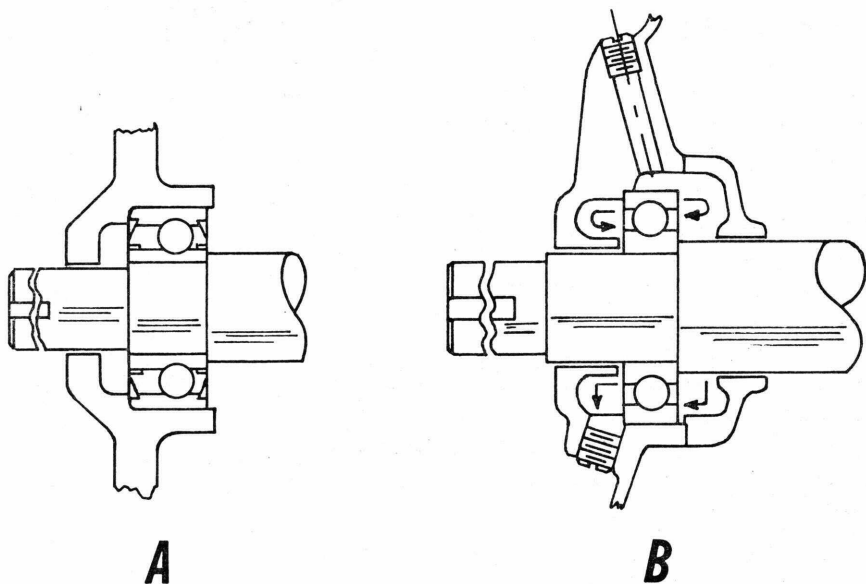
A motor equipped with ball bearings may be mounted in any position. Ball bearings can take a small amount of axial thrust. Bearings may be either (A) the sealed type, requiring disassembly for relubrication, or (B) the type lubricated by grease gun.
